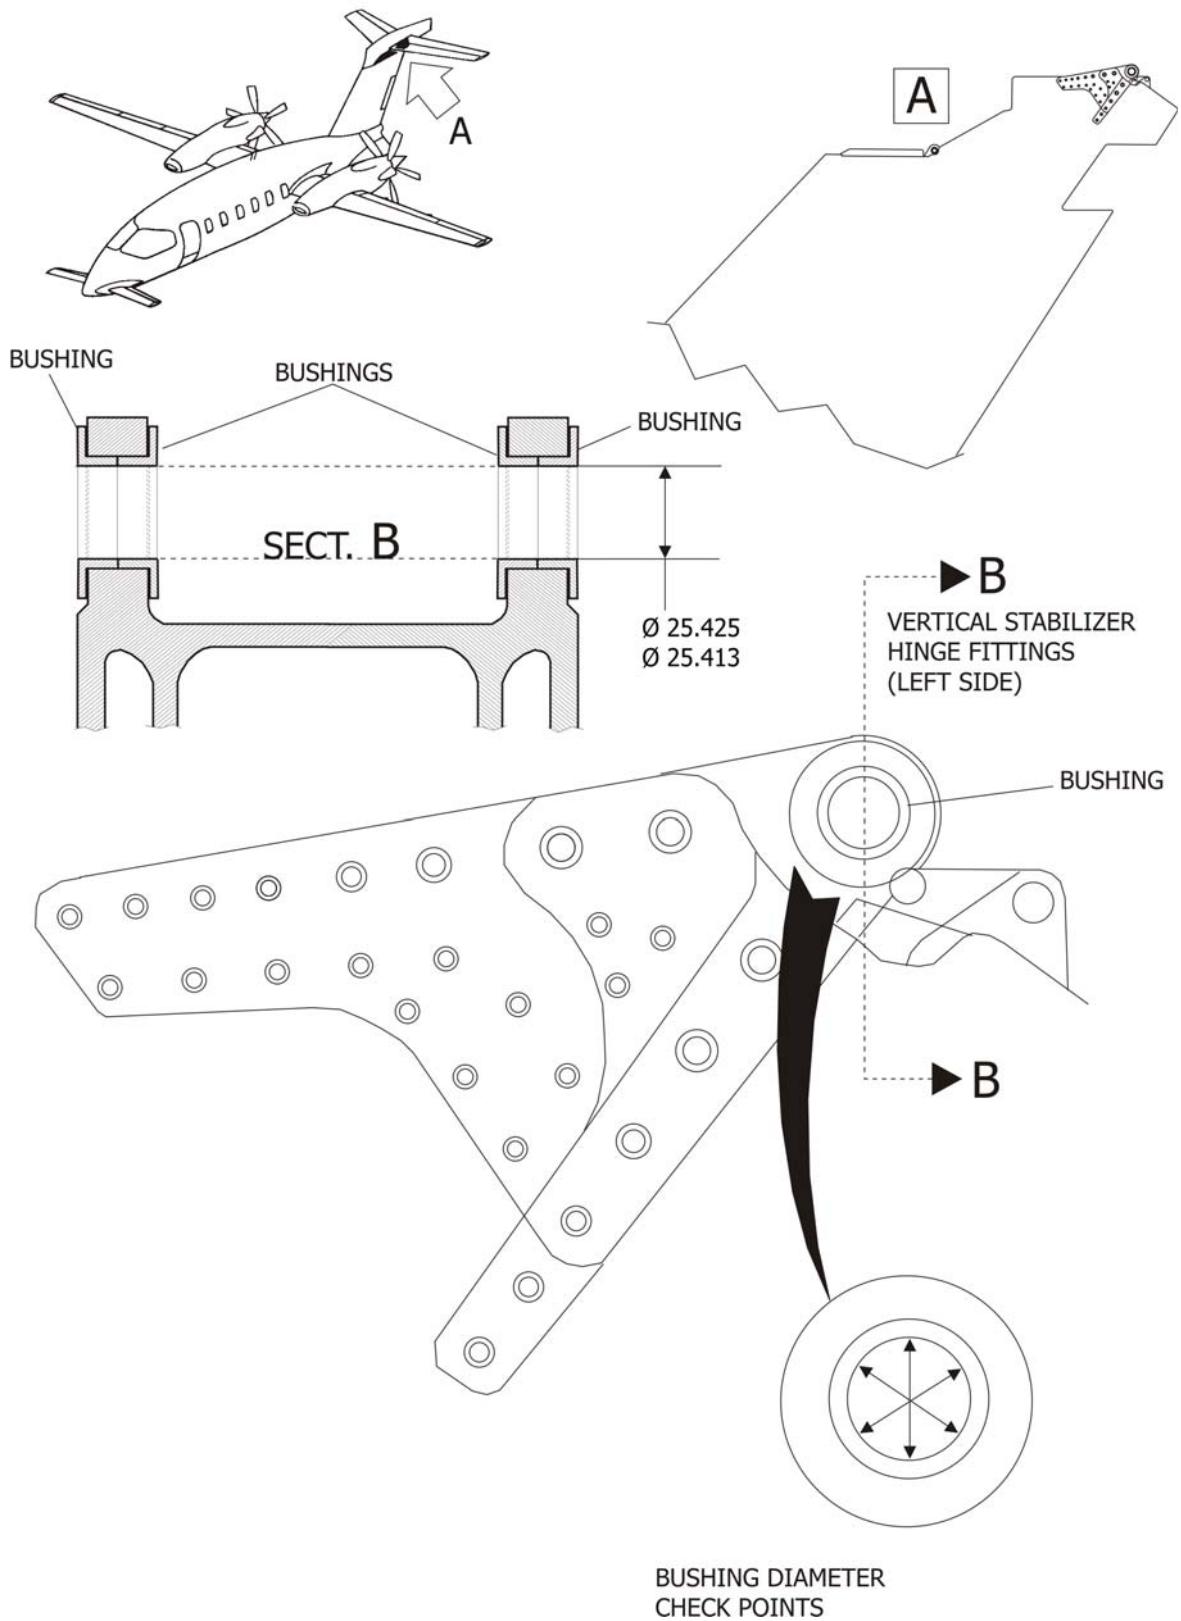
Vertical Stabilizer Hinge Fittings Bushings - Dimensional Check
